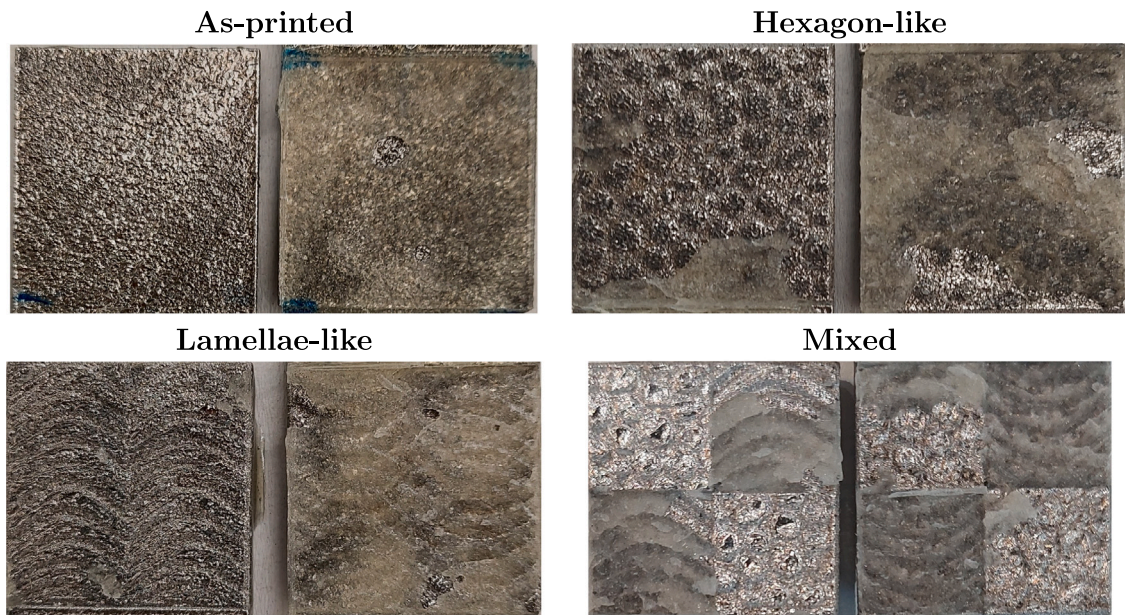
Fracture surfaces of the single-lap joints.
